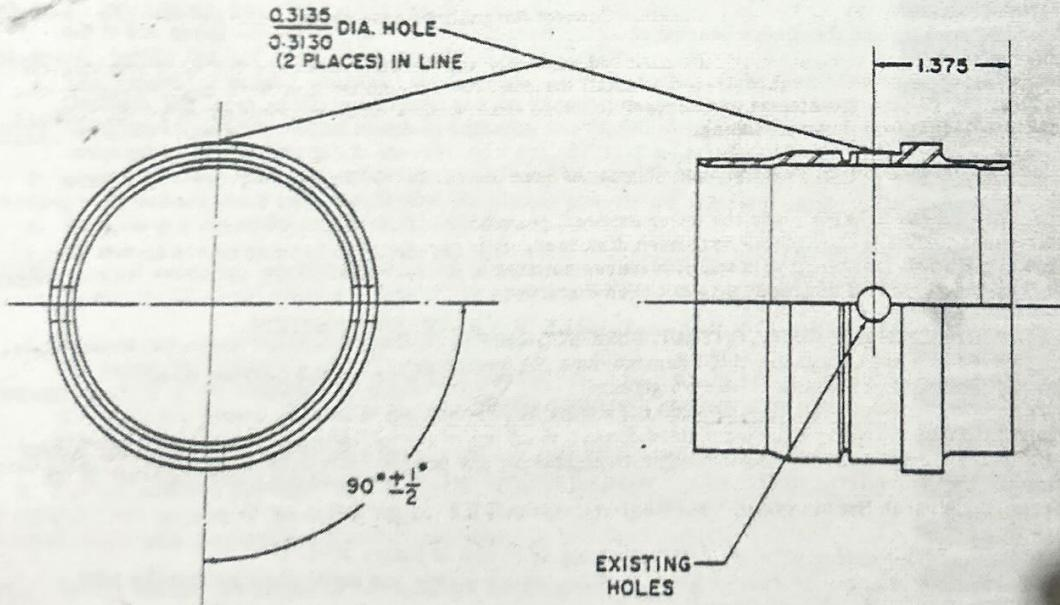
A. Repair of Collective Pitch Bearing Sleeve
